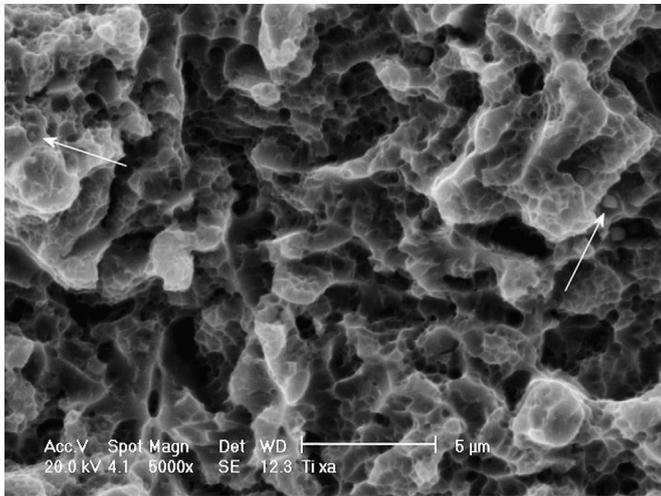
Fractography of the Ti-0.250 wt% Ca tensile sample sintered at 950 °C for 1 min.
